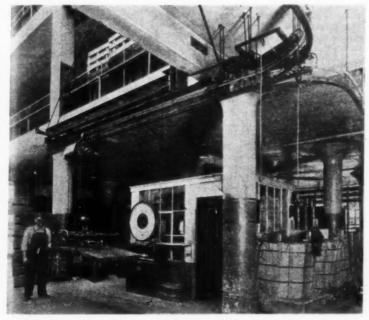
A good combination of materials handling equipment. Note the monorail on the jib, the electric hoist, and the use of a special support for steel plate. (Courtesy Toledo Scale Co.)
